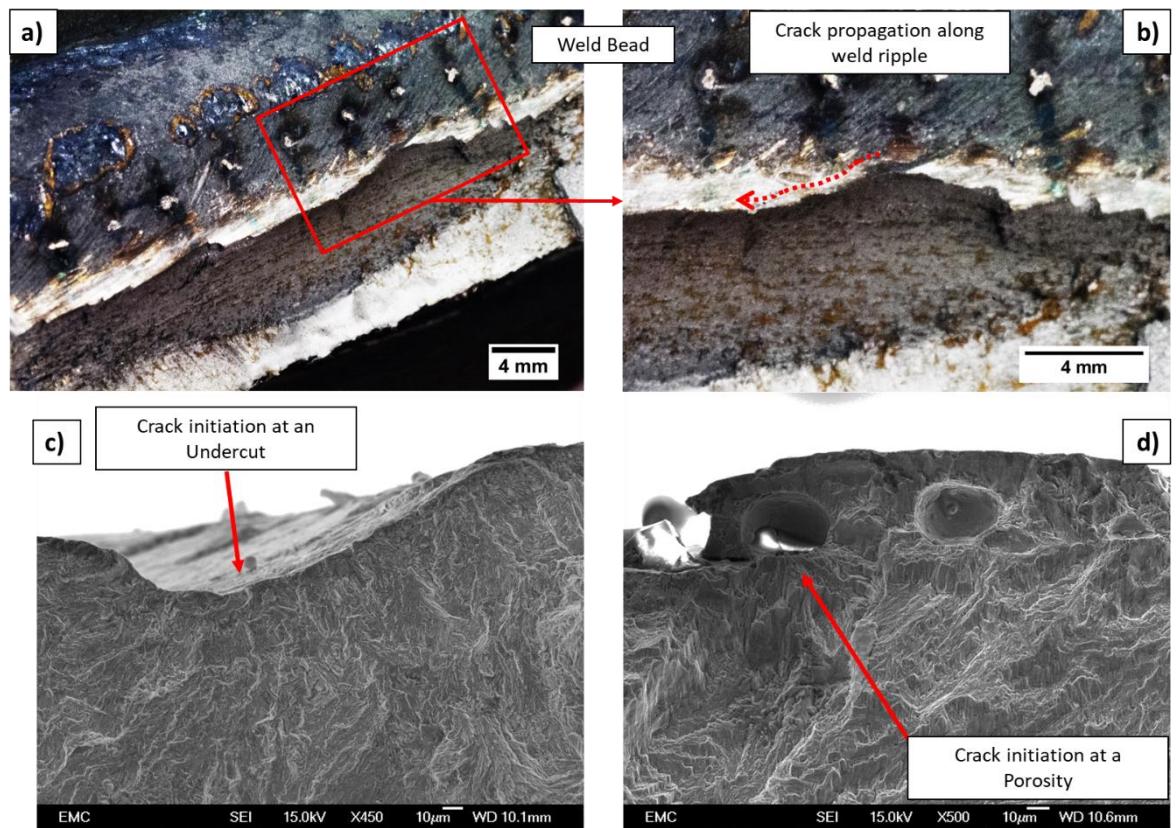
a) Failed weld toe (Optical Camera); b) Cracks propagating along weld ripple resulting in multiple ratchet marks (Optical Camera); c) SEM image of a weld defect – undercut; d) SEM image of a weld defect – Porosity.
